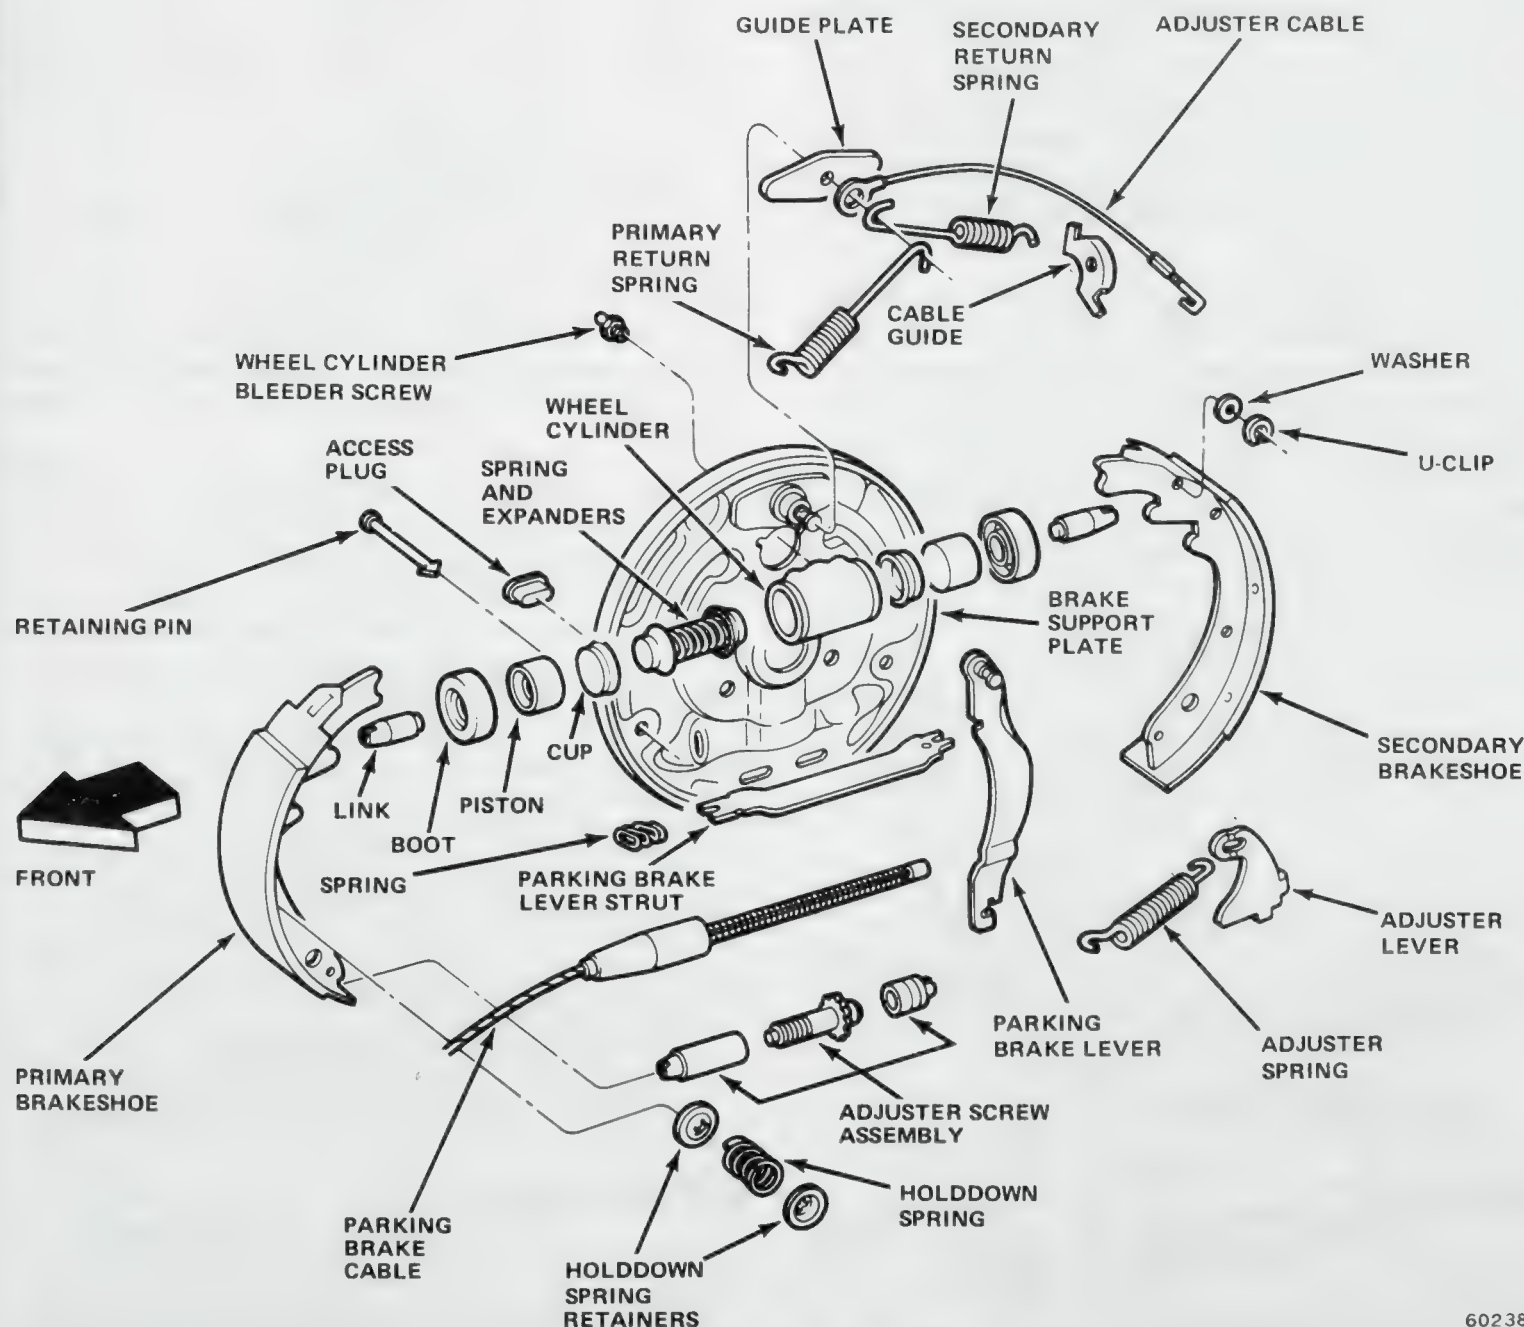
F-42 10-Inch Rear Drum Brake Assembly
